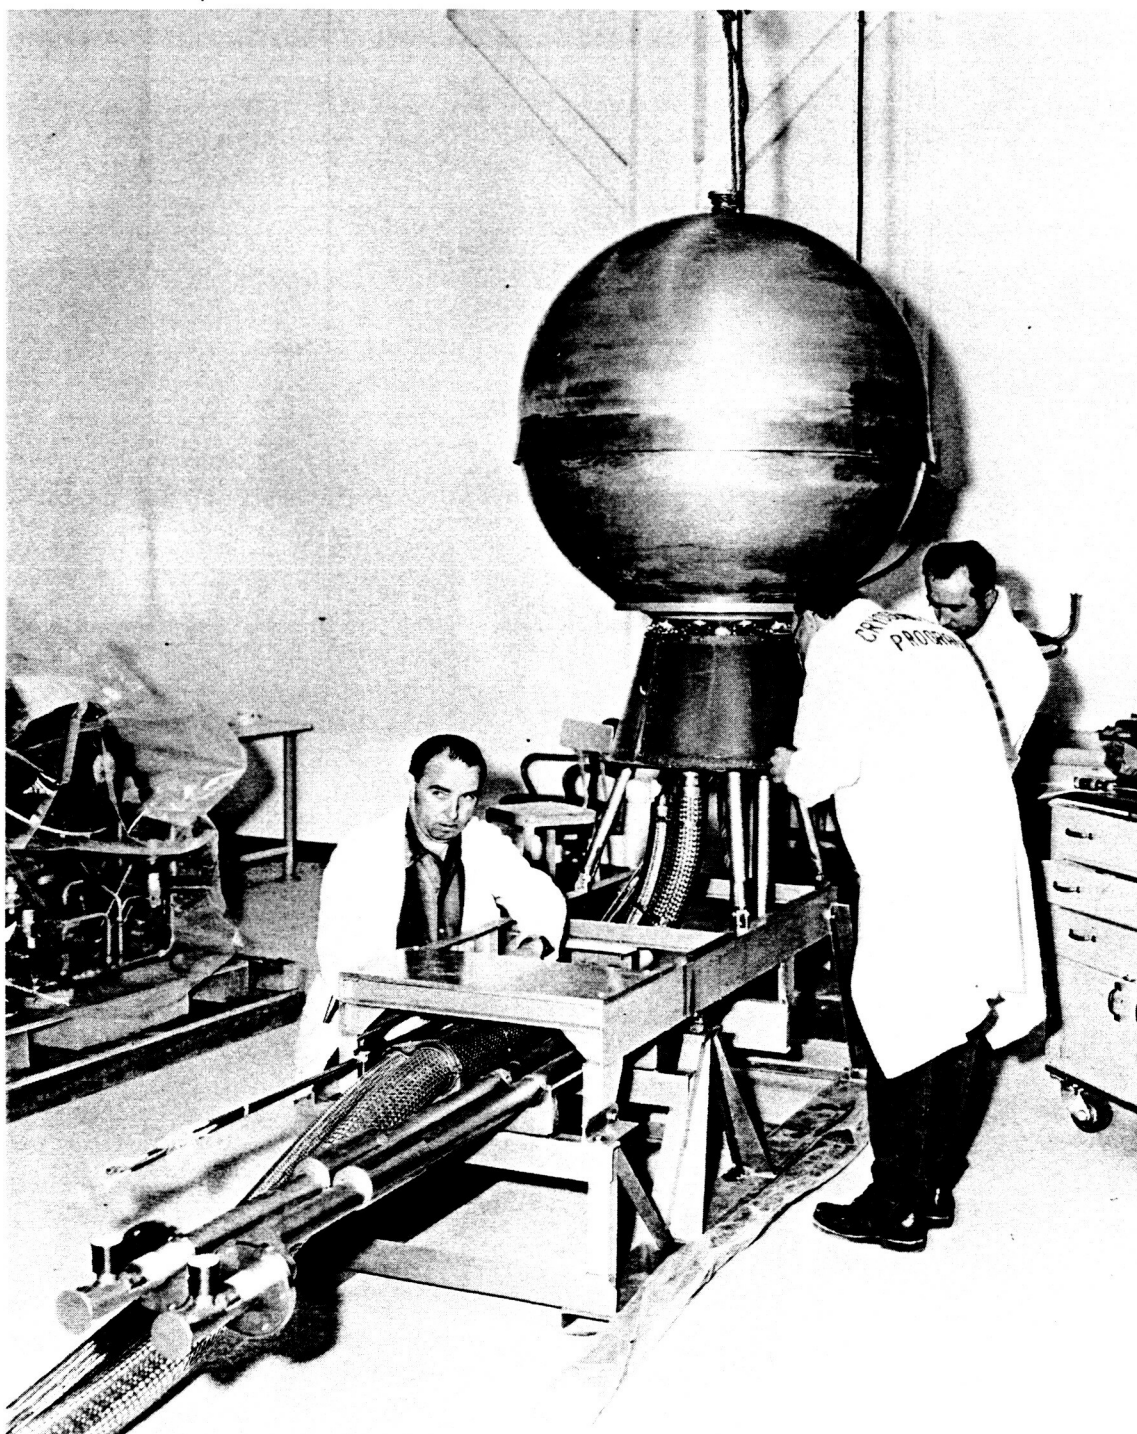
Photograph of the Slush Test Apparatus After Prefit Assembly
